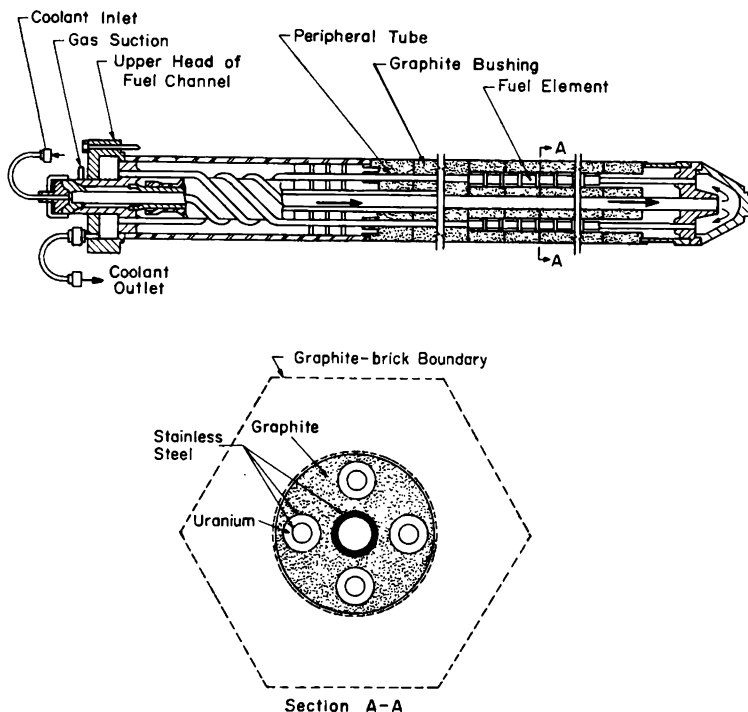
Fuel-element sections of the Soviet APS reactor.²⁰
